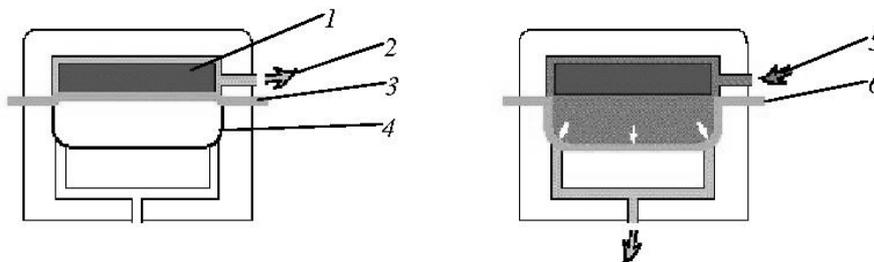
Standard negative type forming [4]: 1 – heating head, 2 – evacuation of pressure from forming chamber, 3 – bottom web before forming, 4 – negative mould, 5 – aeration of forming chamber, 6 – drawpiece from bottom web
